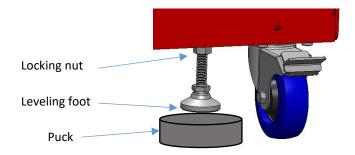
Leveling foot and lock nut. Place standard Hockey puck under leveling feet as shown.
